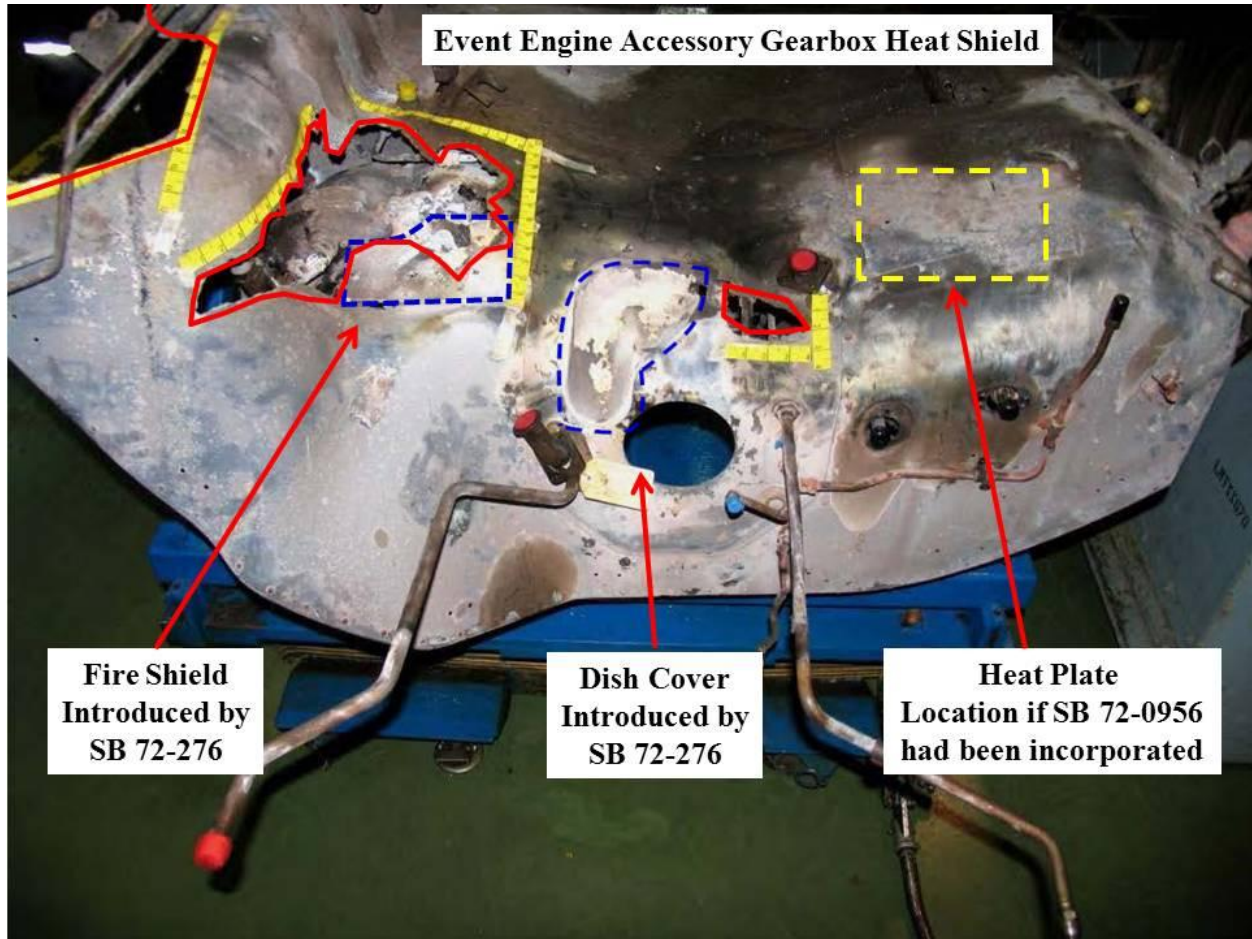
Incident airplane's accessory gearbox heat shield damage and fire shield locations. The red outlines indicate holes and missing materials, the blue outlines indicate installed patches/dished covers, and the yellow outline on the right indicates where the patch from SB 72-0956 would have been, had it been installed.
